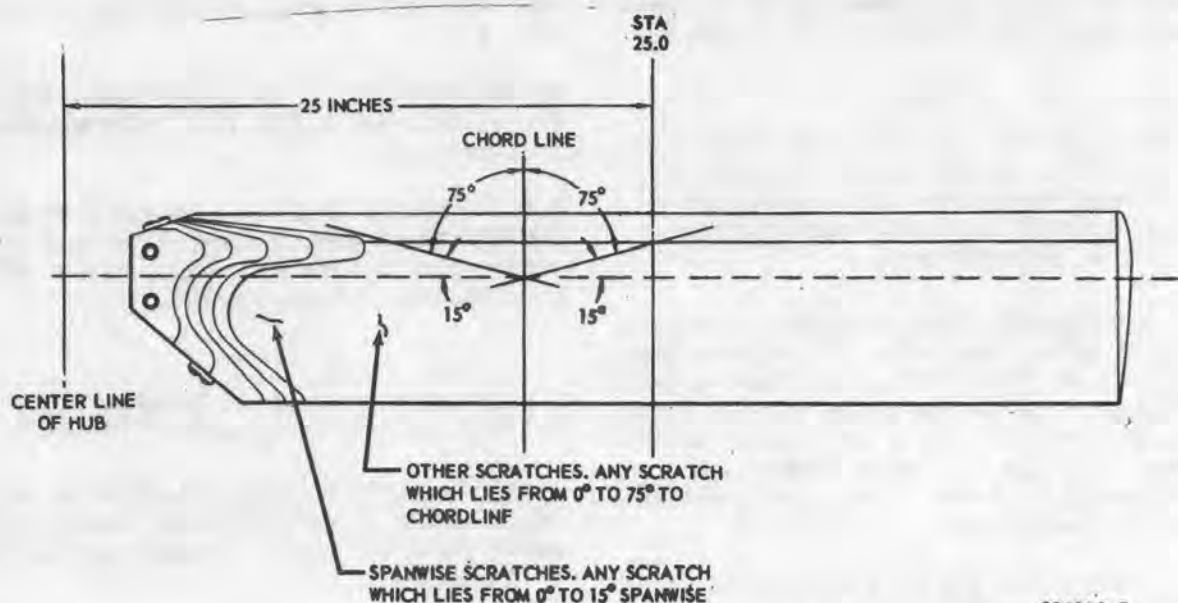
Inspection and repair — tail rotor blades (UH-1A)
